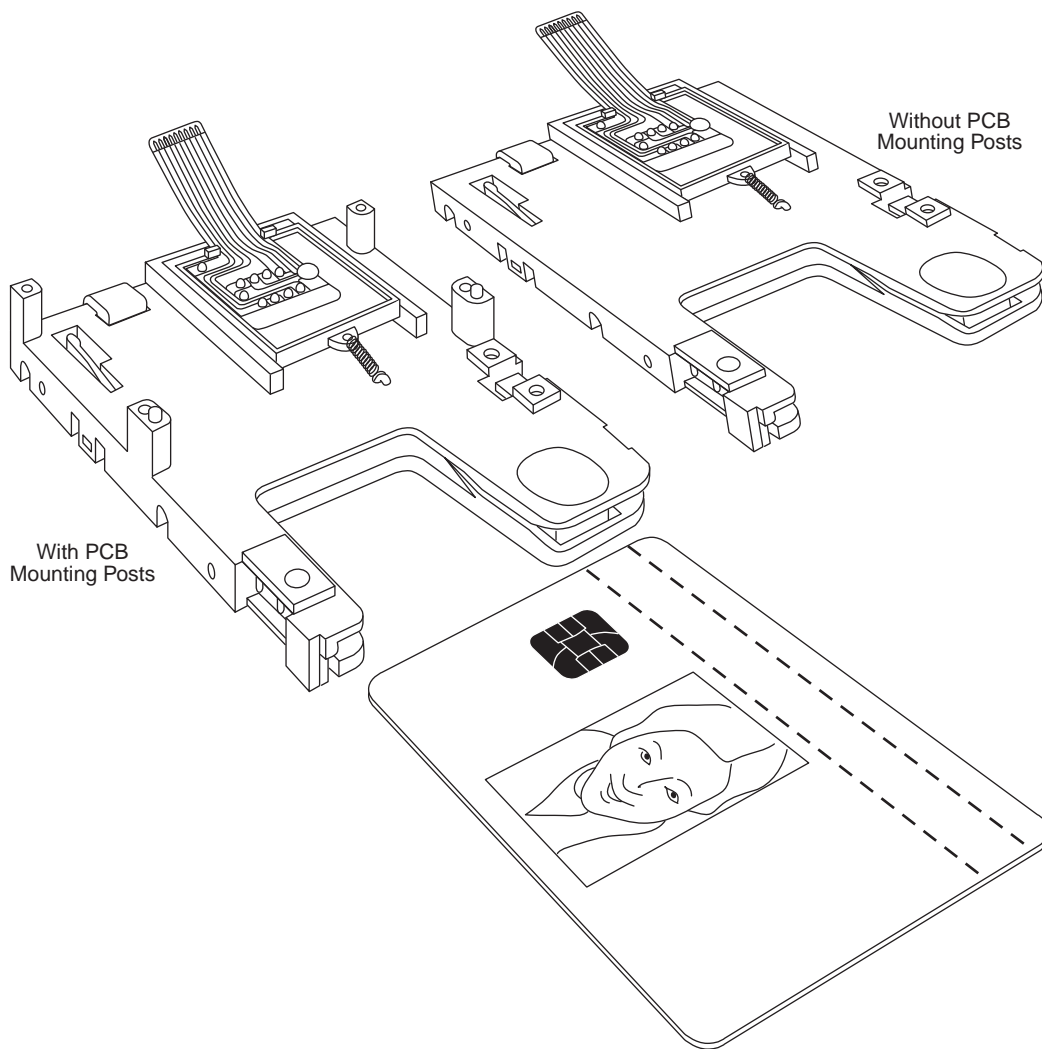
IntelliStripe 70, Hybrid Insertion Reader
